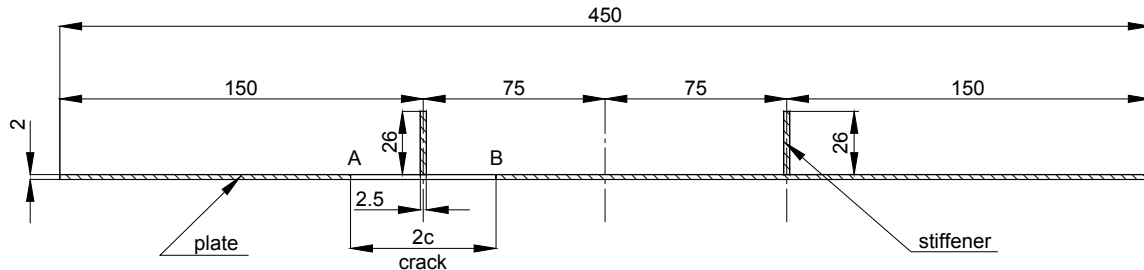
Cross section through the stiffened plate with a crack crossing a stiffener.
